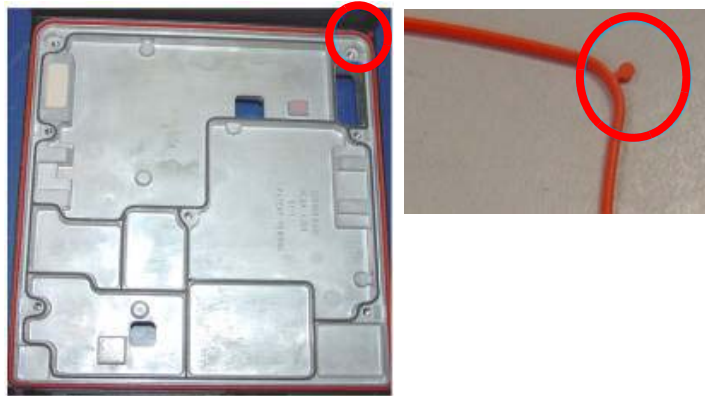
Placing the Transmitter Seal into the main Chassis
